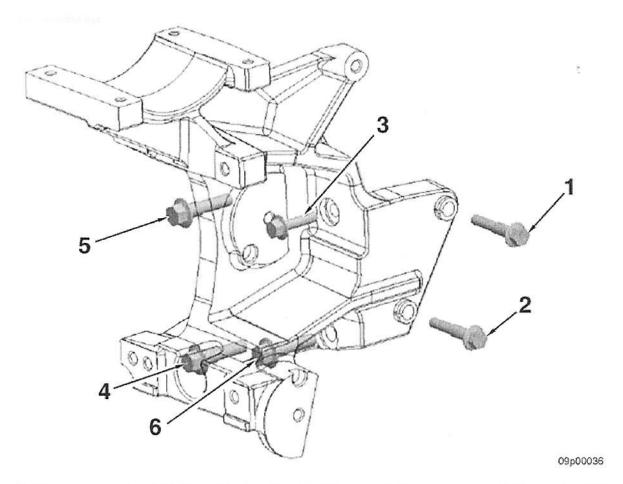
Capscrew Installation Order for Refrigerant Compressor/Alternator Mounting Bracket
